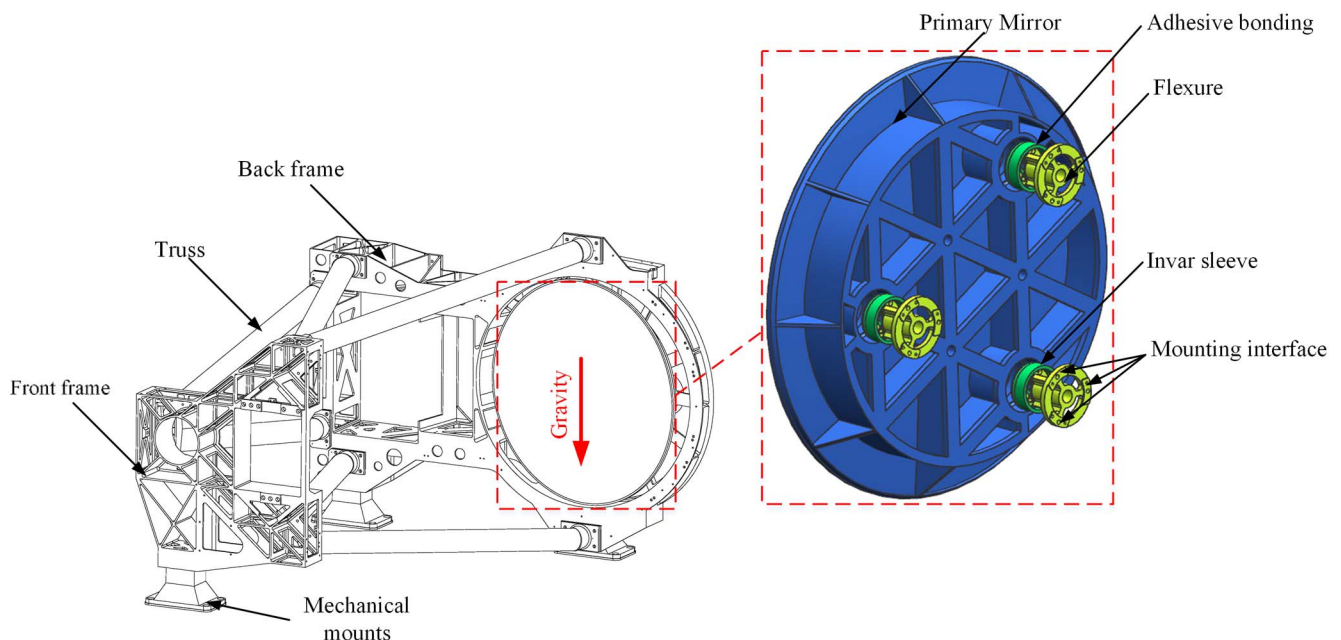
Components of the space telescope and exploded view of the pre-designed lightweight primary mirror assembly showing the symmetries, invar sleeve, and mounting interface.
